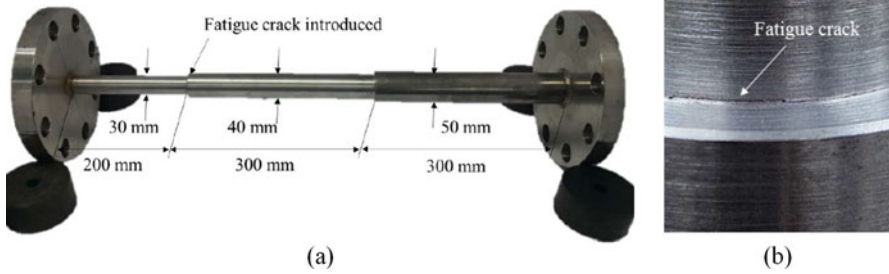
(a) Steel shaft specimen with a fatigue crack and (b) close-up image of the fatigue crack through a penetrant testing [49]
